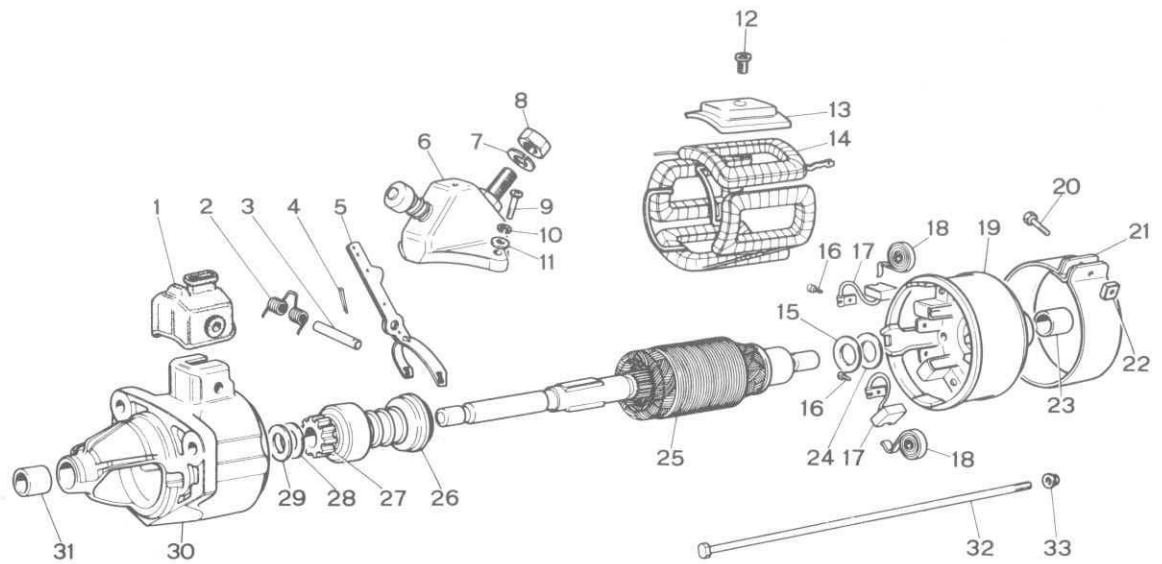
4 Components of the starter motor. The yoke or body is not shown
